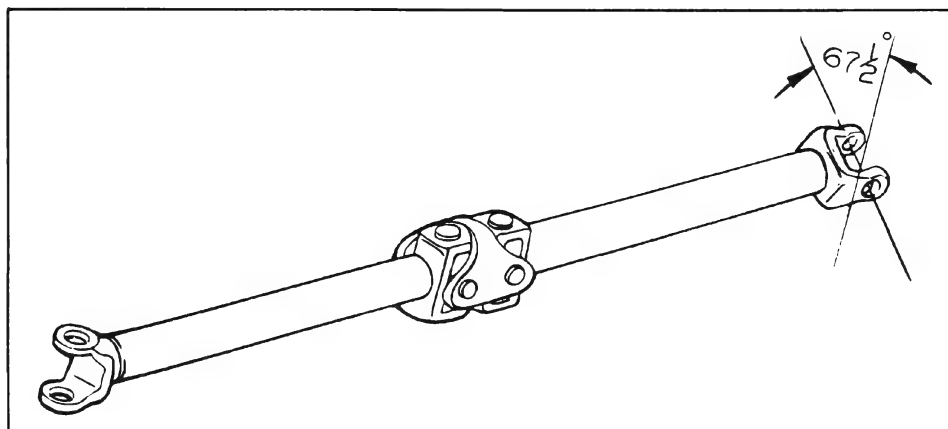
Propeller Shaft Phasing—4400-4600-4800 Series
